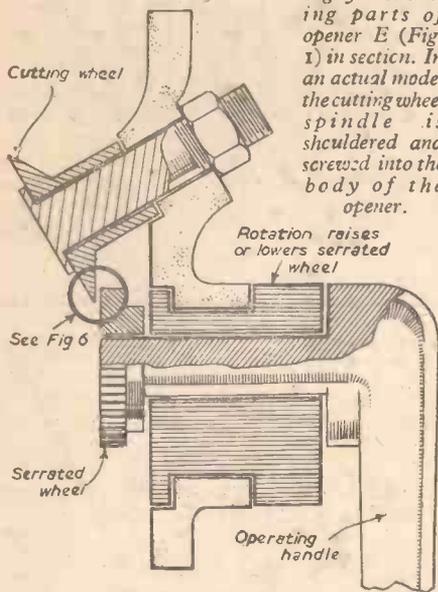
Working parts of opener E (Fig. 1) in section. In an actual model the cutting wheel spindle is shouldered and screwed into the body of the opener.
